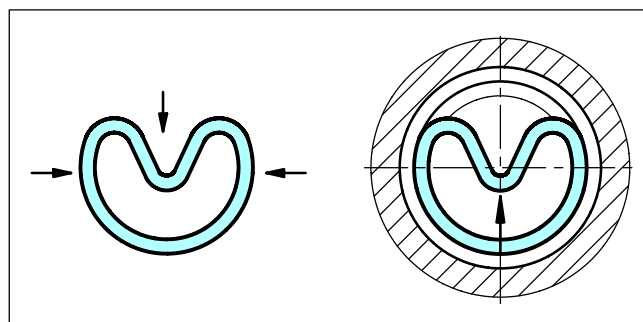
Place the Turcon® Excluder® G in compressed form into the groove and push against the Scraper in the direction of the arrow
